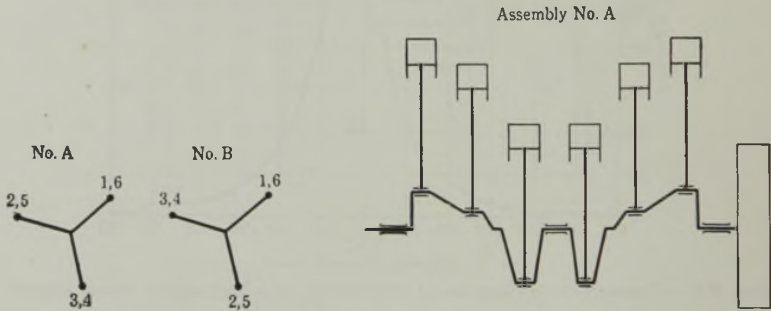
Figure of a six-cylinder crankshaft and piston assembly.
